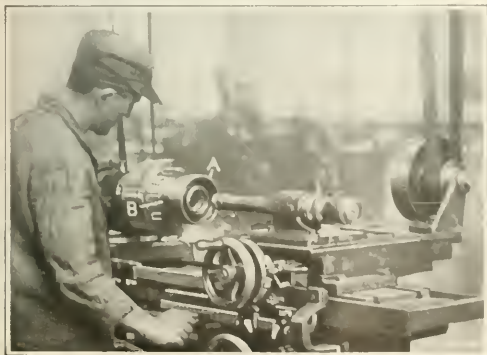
Method of using Heald Rotary Magnetic Chuck for holding Work for Internal Grinding
